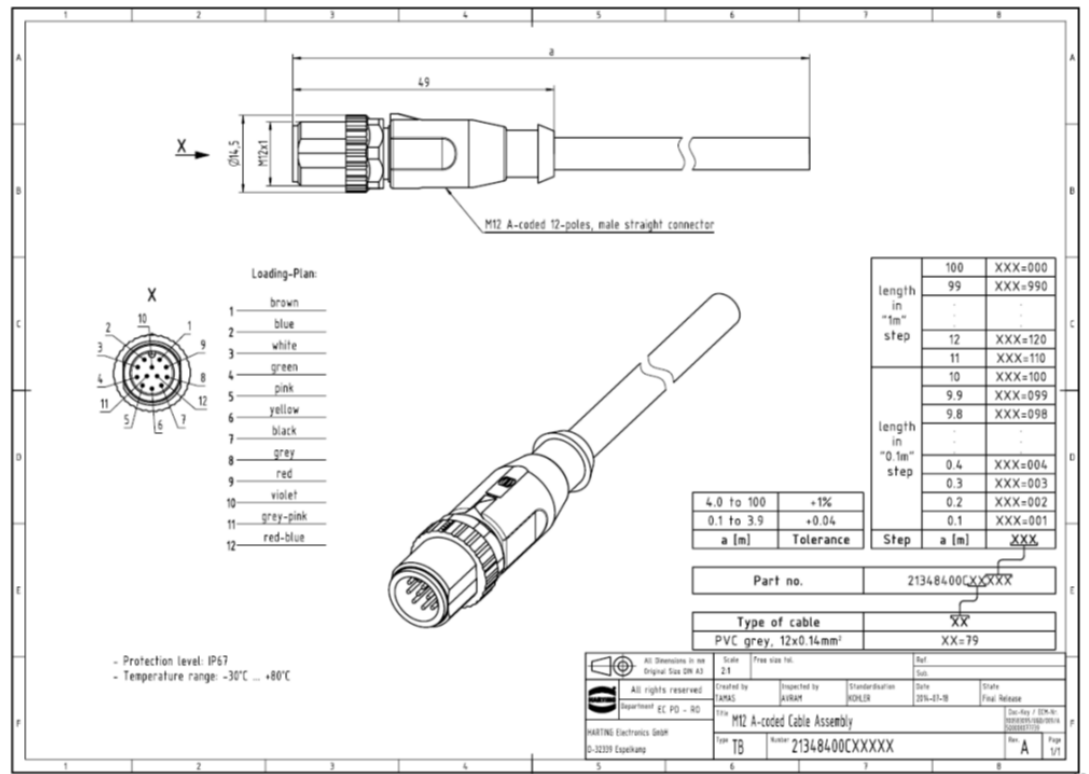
M12 A-coded Cable Assembly of Harting Breakout Cable
